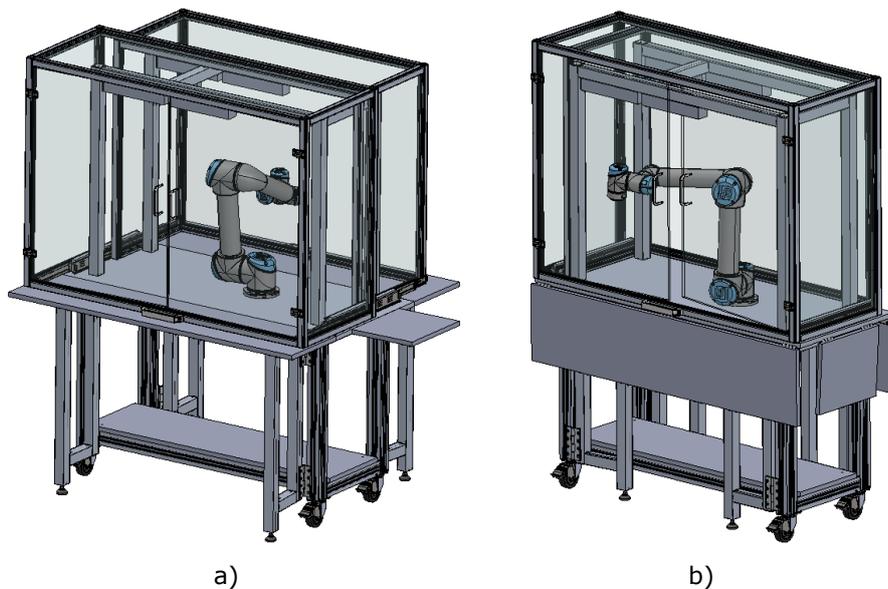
Location of the camera and light sources in the test bench where a) opened test bench and b) closed test bench
